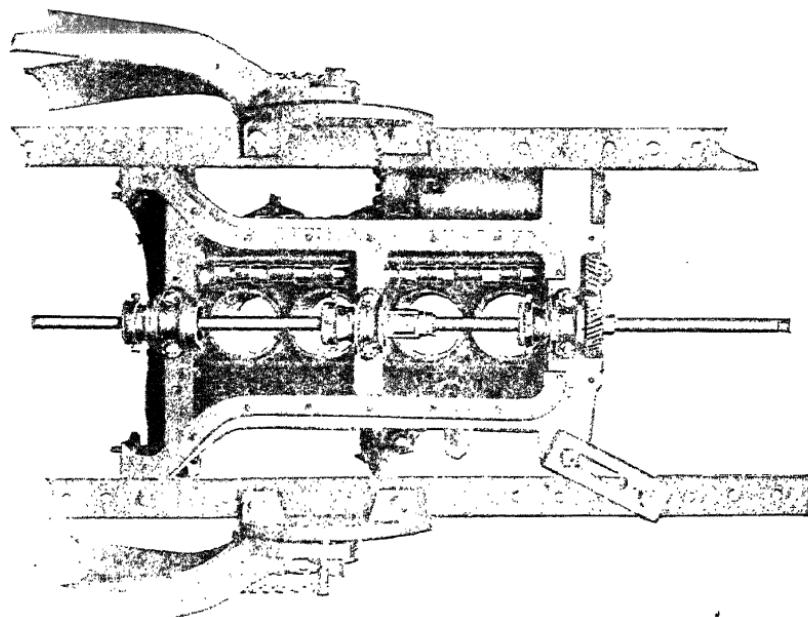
Alignment Reaming Three-Bearing Crankshaft
